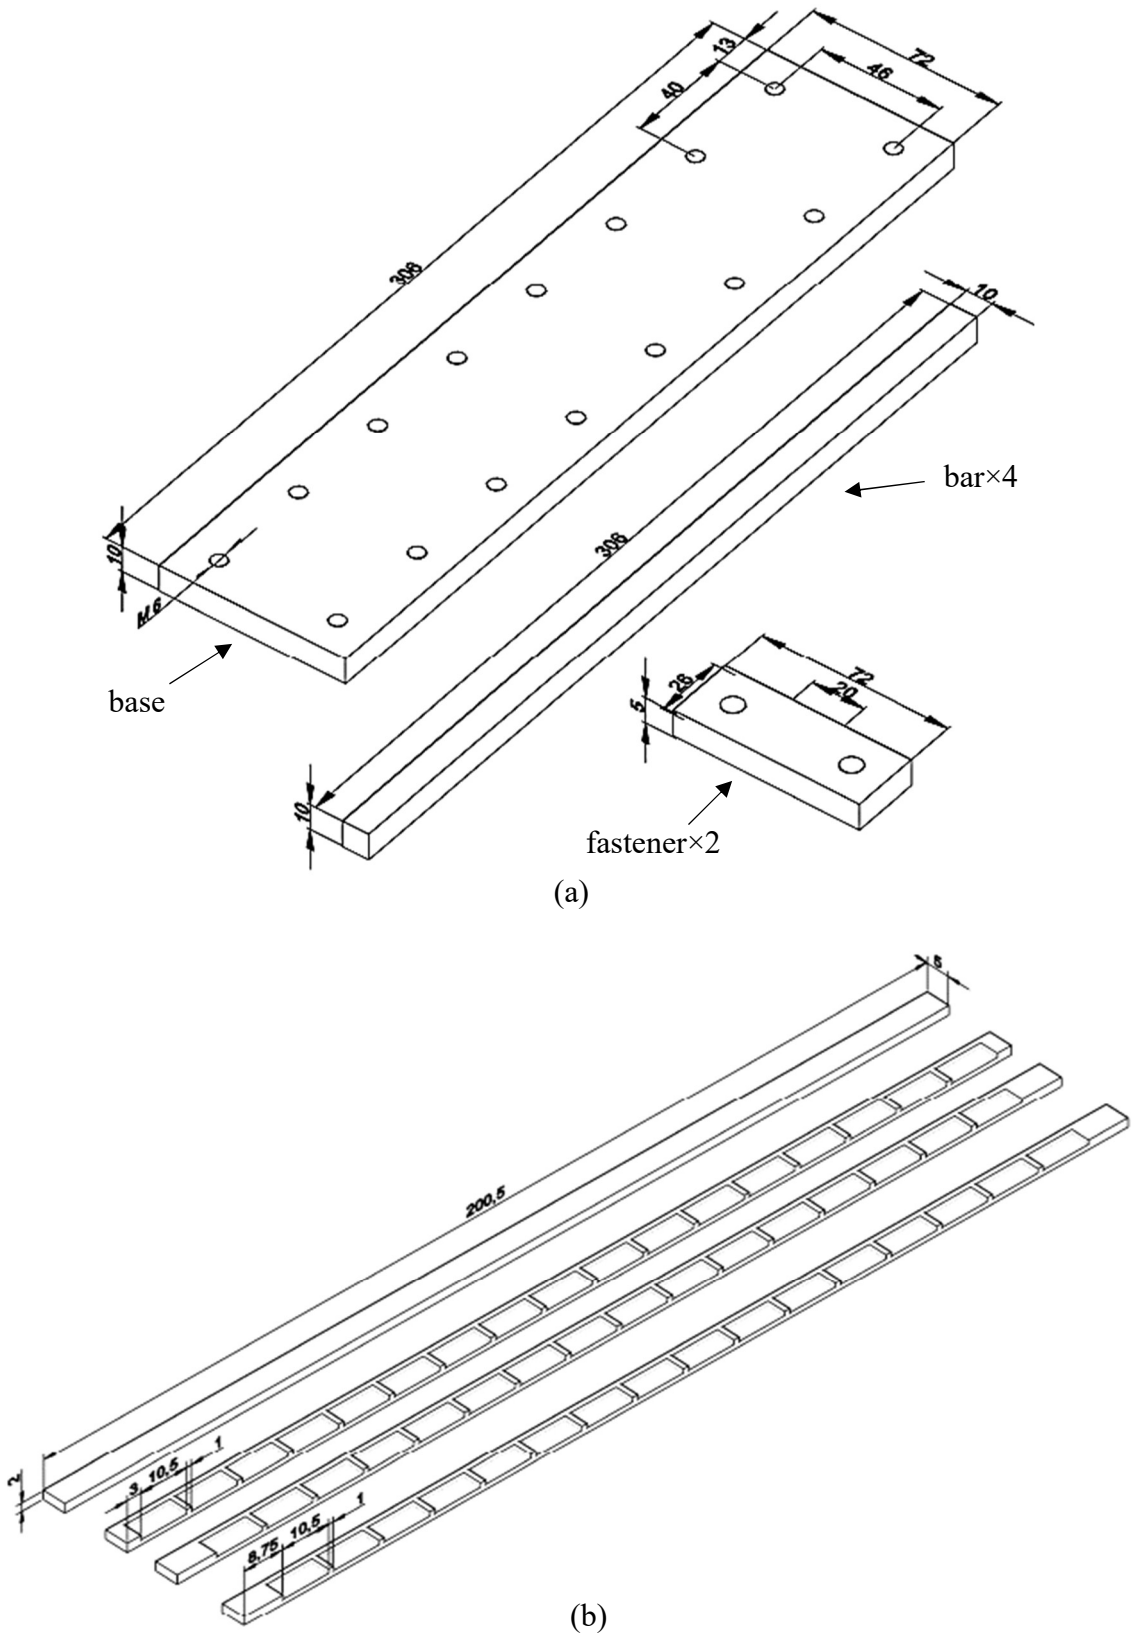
Drawing of Specimen mould (a) aluminium elements (b) plastic straps
